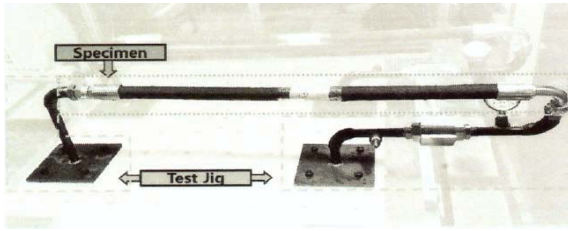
Hydraulic Hose and Hydraulic Hose Jig
